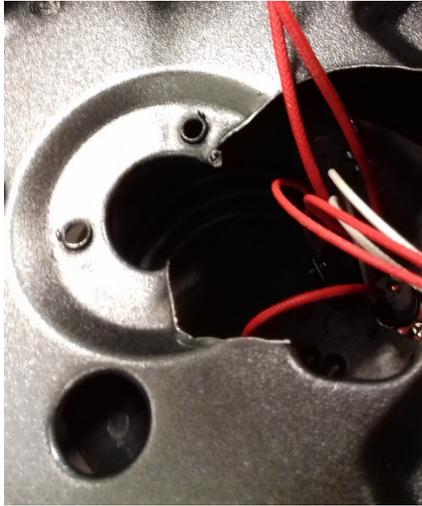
BES 12V DC EPC chassis with jagged roughly cut hole and wires
